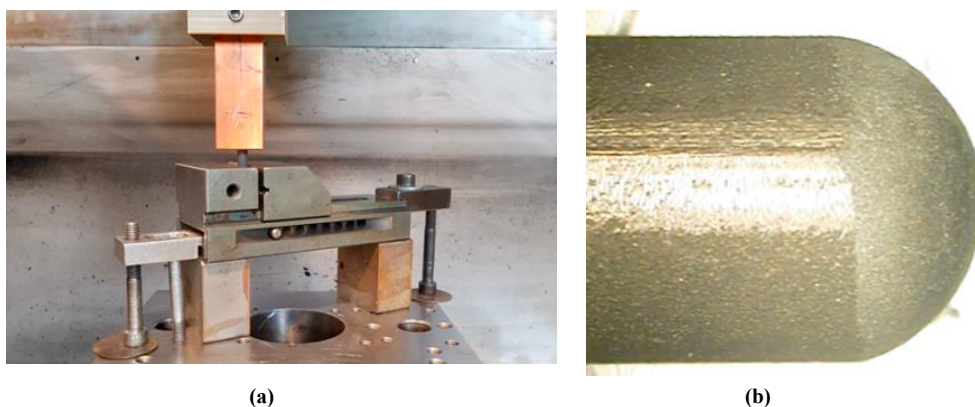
a) Machining of the hemispherical head of the pin b) Hemispherical head of the pin
